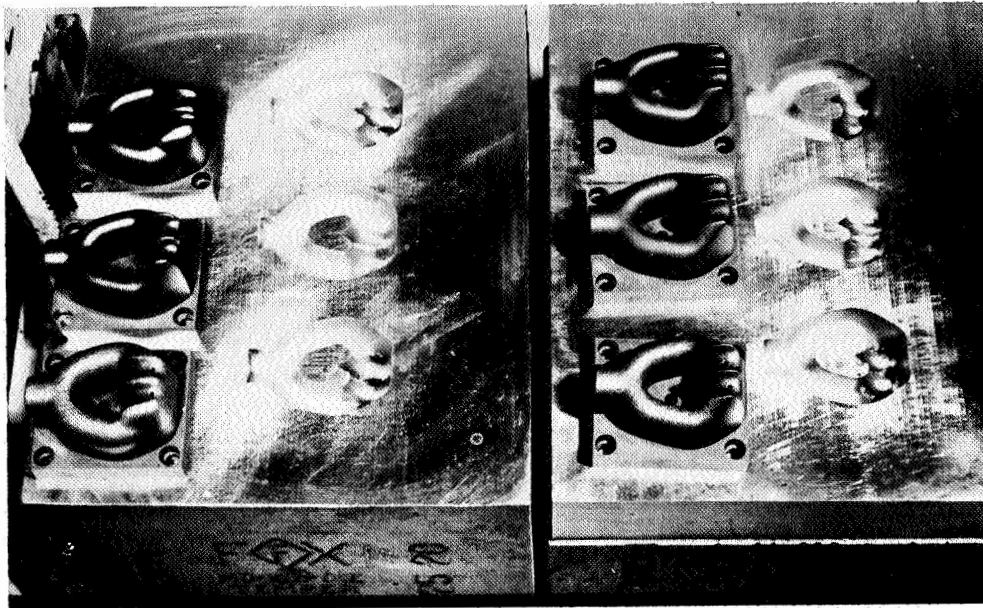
EDM-PROCESSED FORGING DIES (REF. 115)
